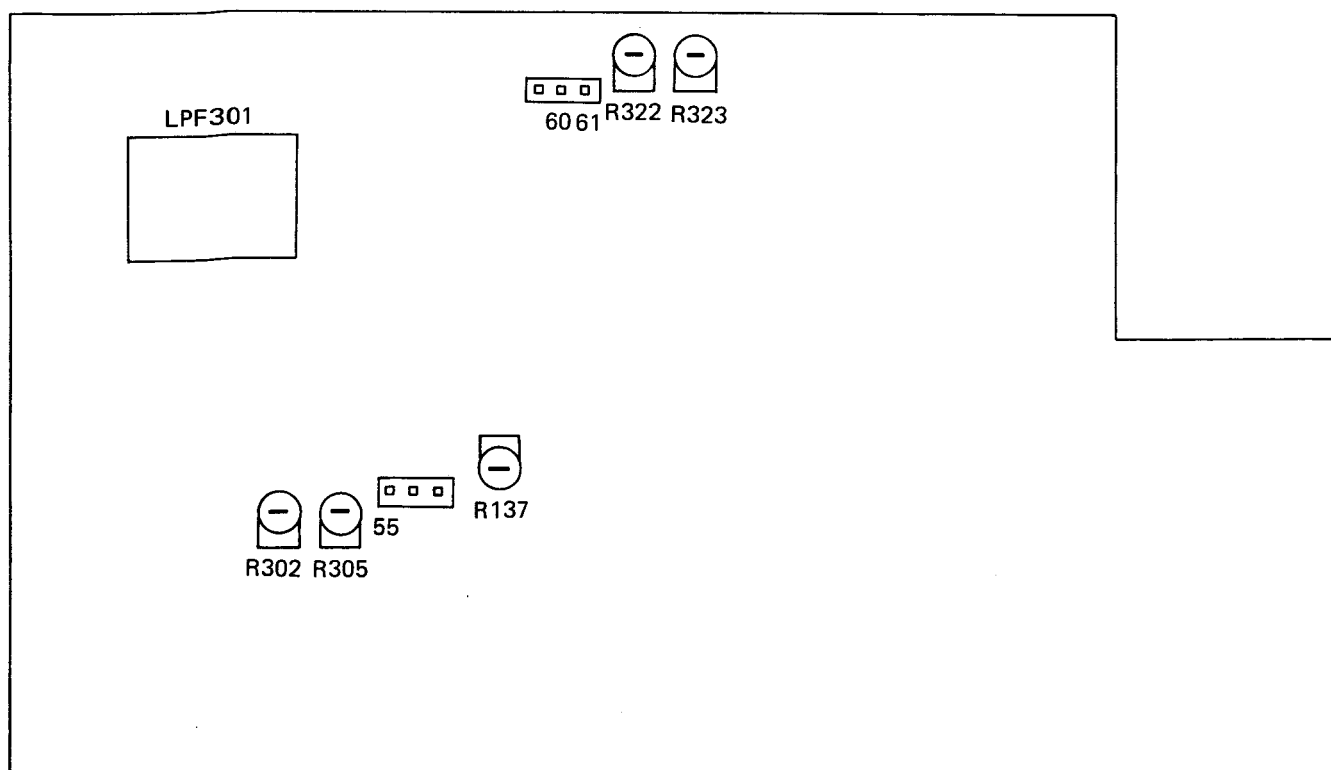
MPX/REGULATOR CIRCUIT BOARD (TOP VIEW)
